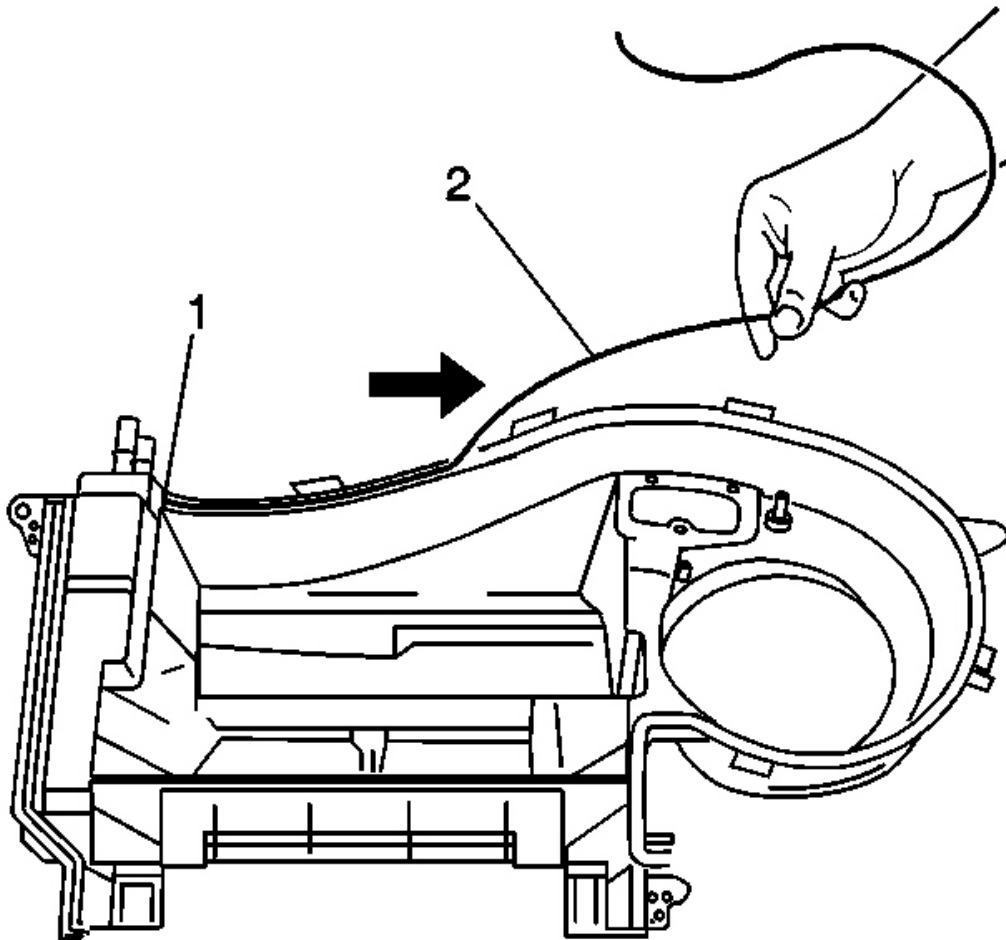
Lower HVAC Module Case & HVAC Module Case Primary Seal
